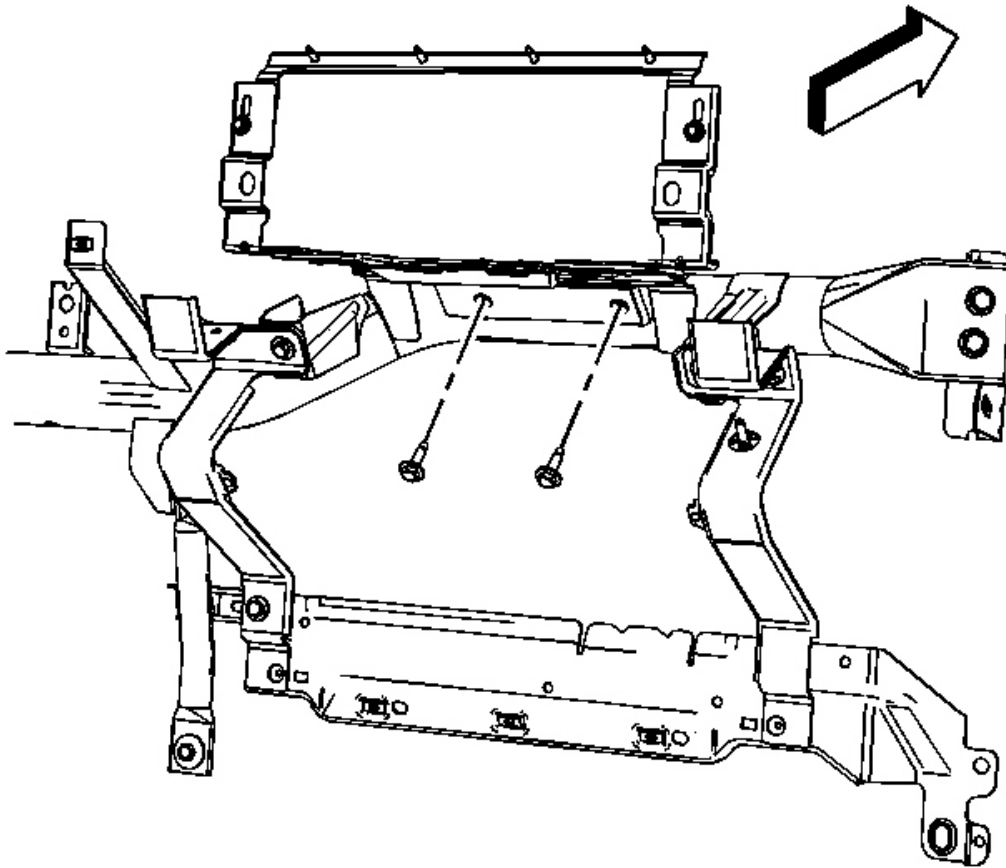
View Of PSIR Bracket To I/P Structure Fasteners
